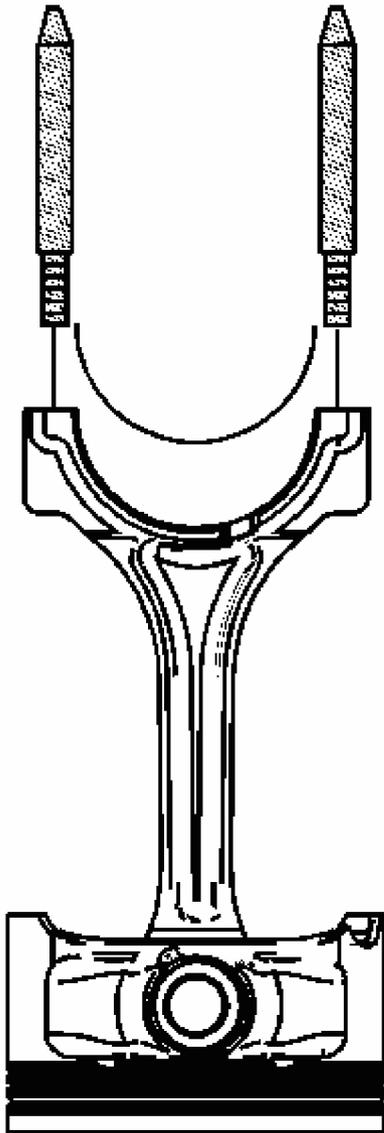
View Of Piston/Connecting Rod Installation Tool
